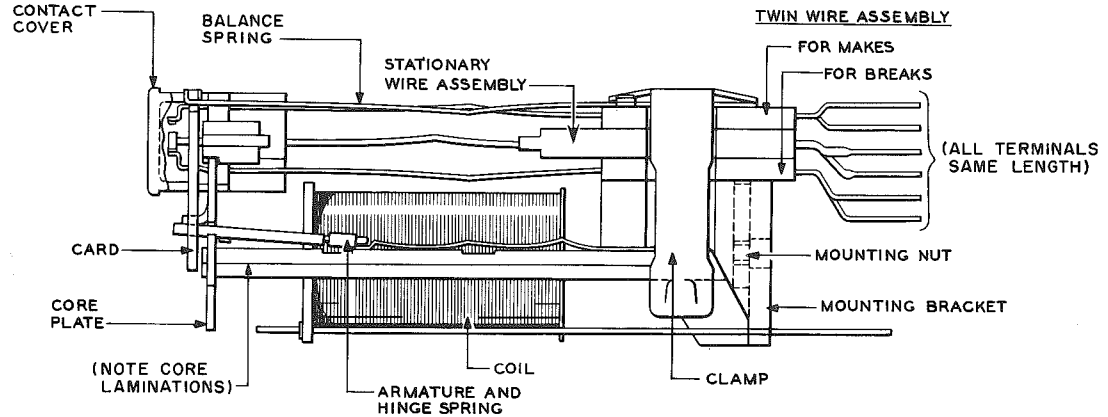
Top View of AF Relay Showing Location of Parts
